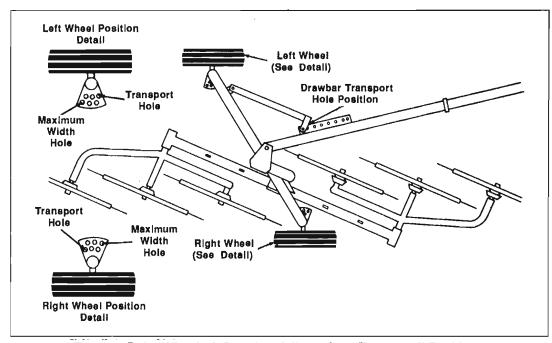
Rake Wheels & Drawbar Adjusted to "Transport" Positions
